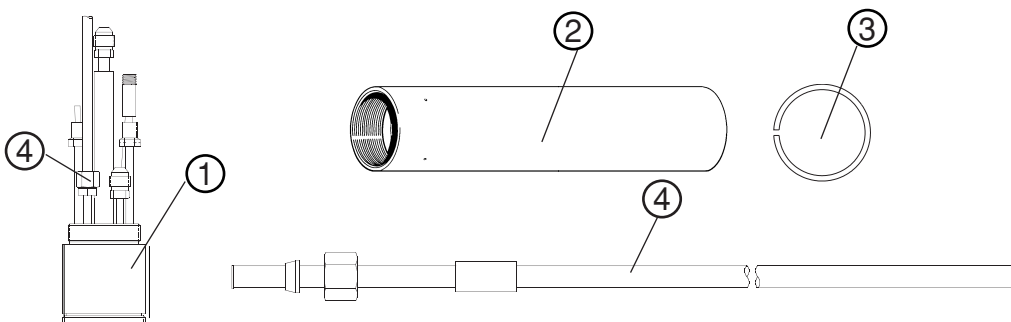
Straight Torch Quick Disconnect Assembly, Mounting Sleeve, Spacer and Torch Vent Hose
